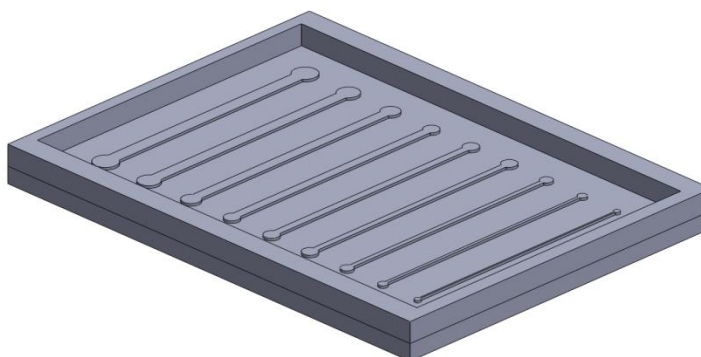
Different Dimension Straight Channel Master Mold Design
